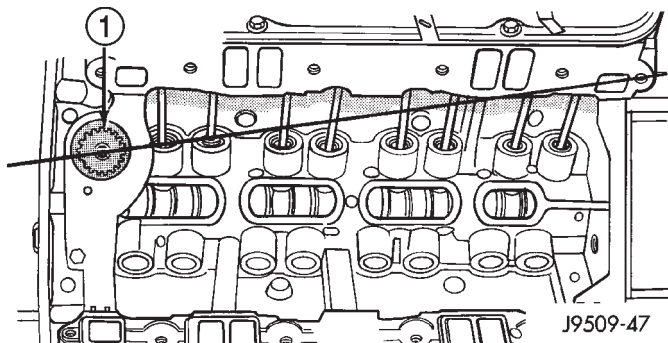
Burnishing Distributor Driveshaft Bushing
